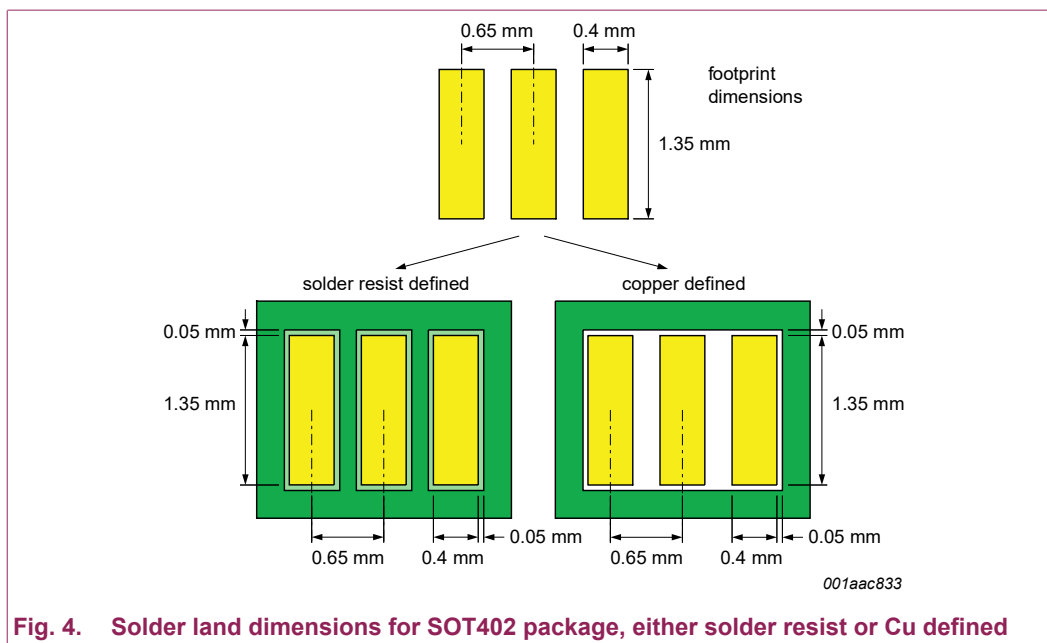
Solder land dimensions for SOT402 package, either solder resist or Cu defined
